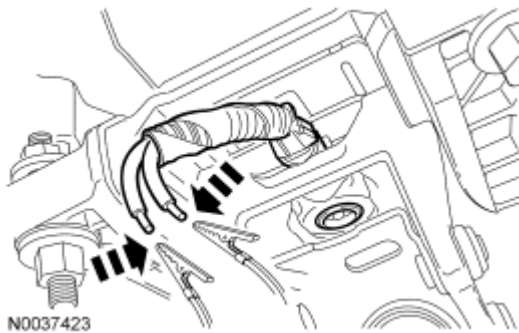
Connecting Jumper Harness To Wires Of Deployable Steering Column
